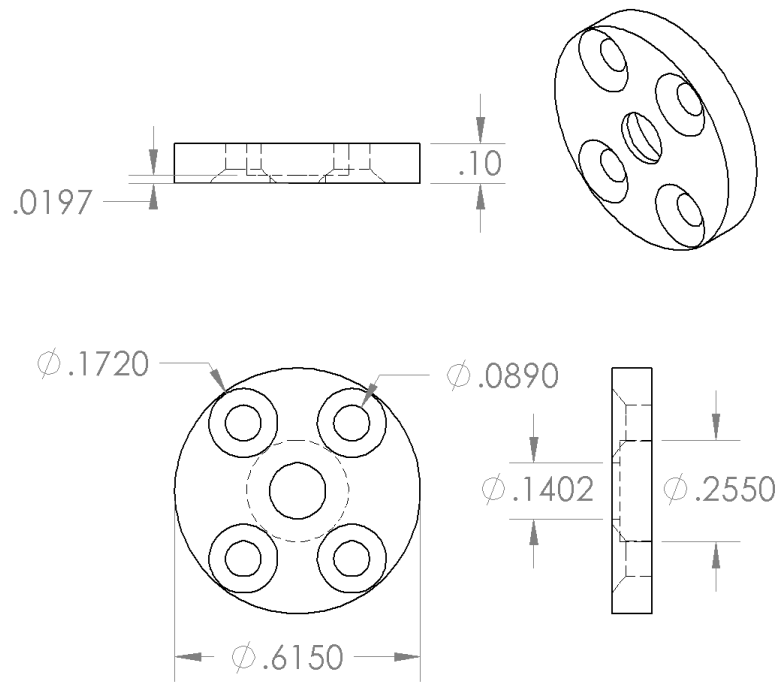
Technical drawing of fiber adapter clamp. Hidden dimensions are shown as dashed lines. Dimensions are shown in inches.
